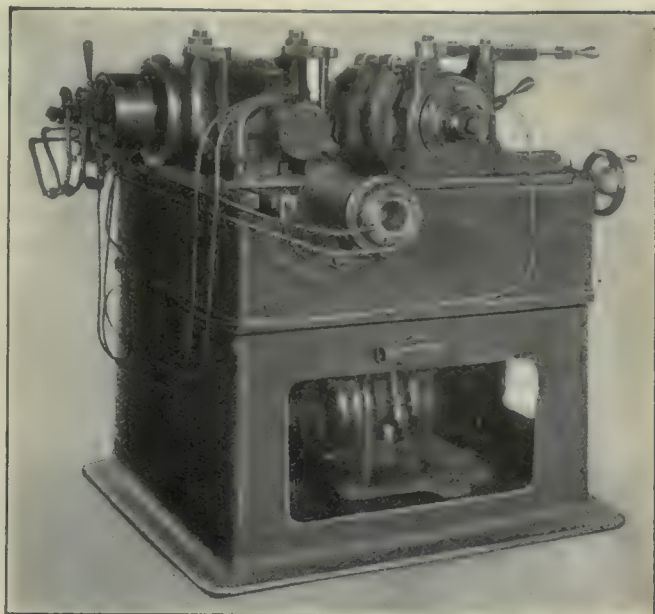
REAR OF DAVENPORT GEAR TESTING MACHINE
